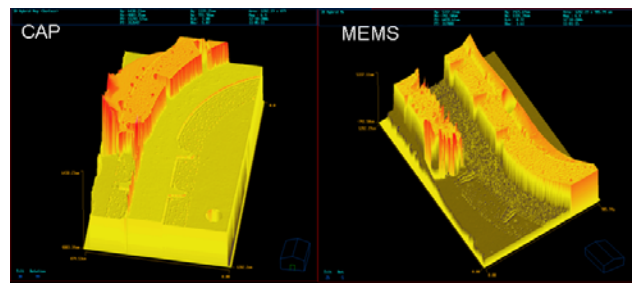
Solder distribution after bonding with TiW adhesion layer measured by optical profilometer on open sample. Most of solder moved out of the area where it was plated.
